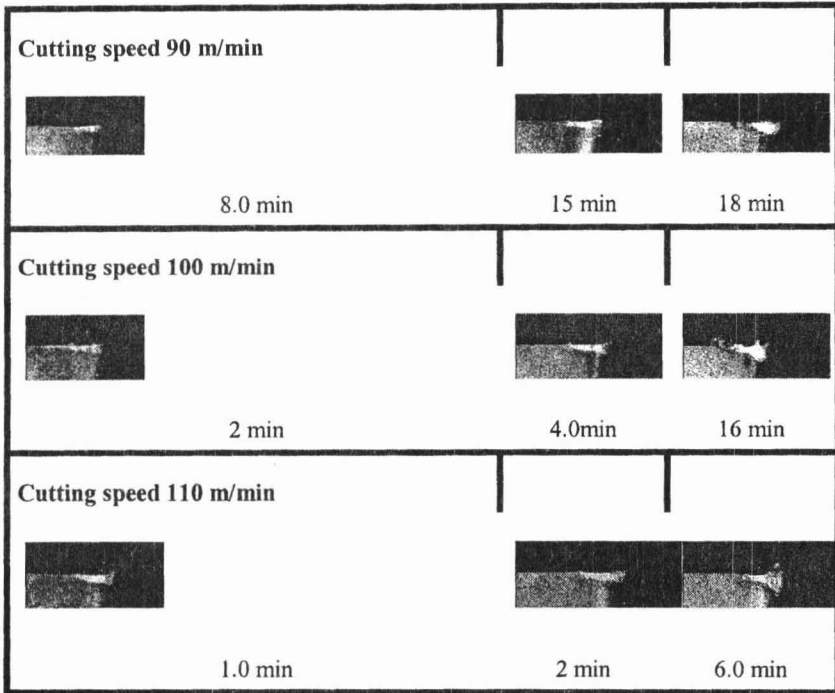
Flank Wear at Various Cutting Speed using Nozzle Size of 1.5mm
